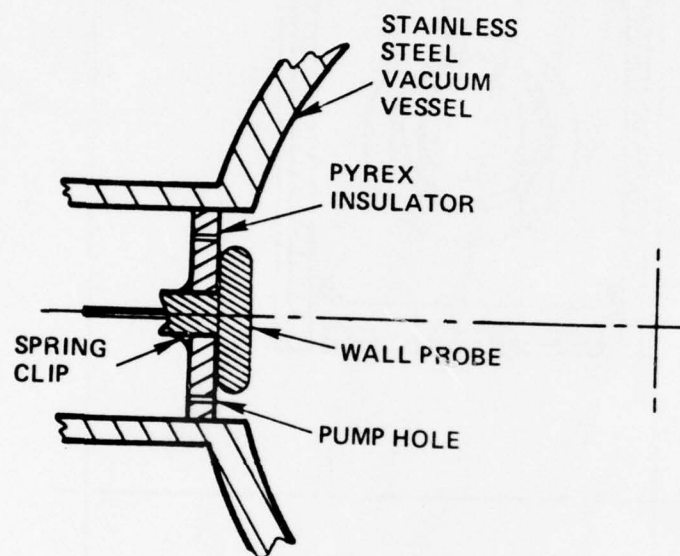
Cross-Sectional Drawing of a Wall Probe.
